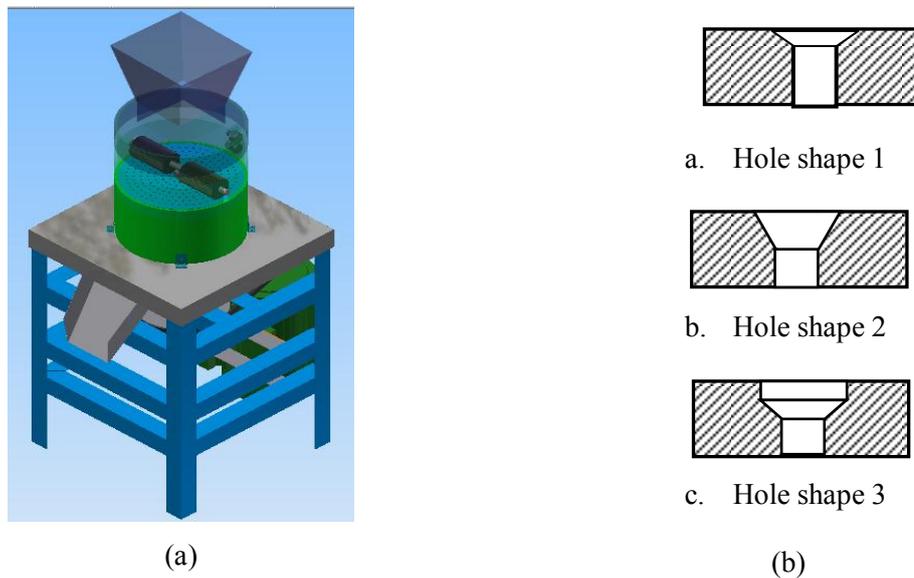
Machine pellet machine with roller wheel system (a), and the shape of hole-mould (b)
